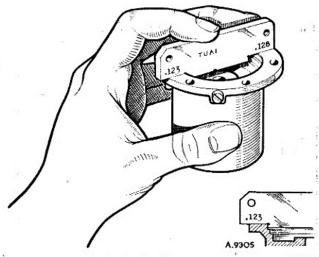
Checking the depth of coil housing step using gauge TUA 1
